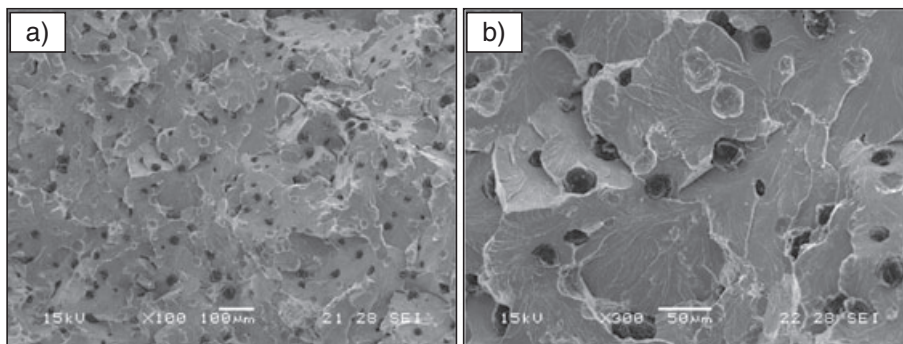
Fracture surface from bending test. Different magnifications.
